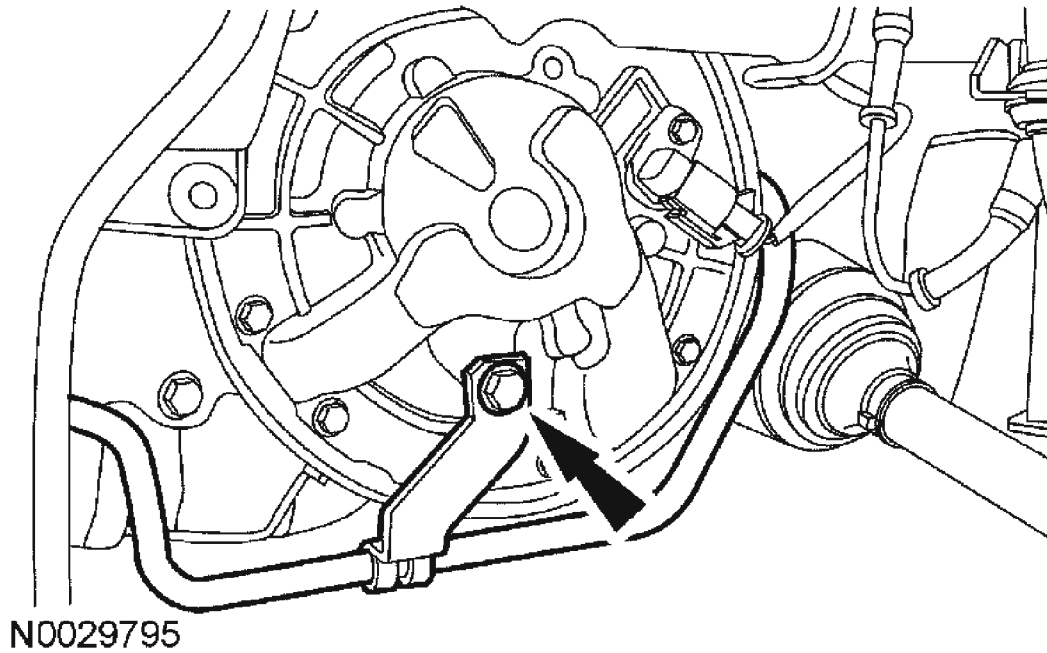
Removing Vent Tube Hose From Main Control Cover
